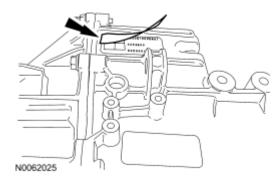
Special Tool (303-1245) On LH Cylinder Head Courtesy of FORD MOTOR CO.
